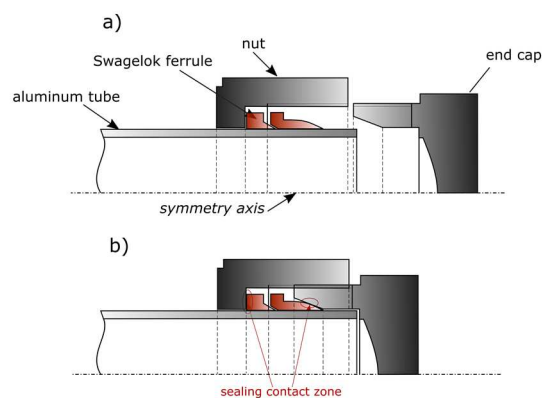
Design of the seal with steel nut, end cap and Swagelok ferrules (a) open ; b) closed and sealed)
